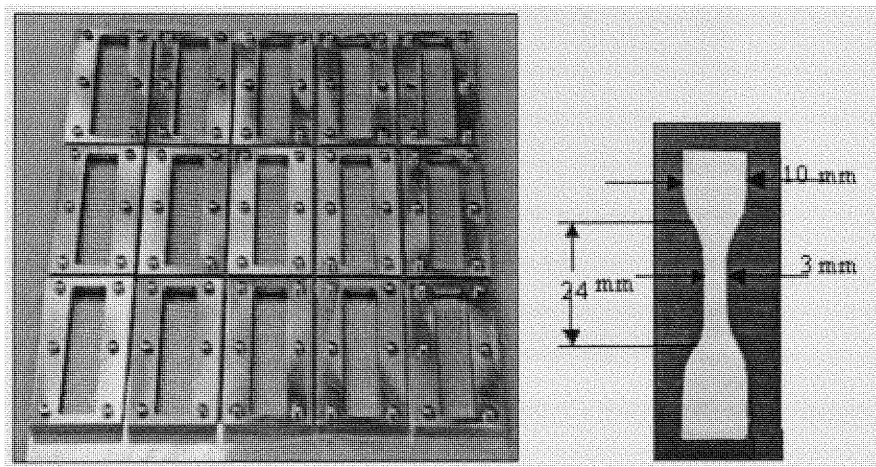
Three-plate assembly used to mold rectangular specimens for mechanical tests and dog bone specimen dimensions
